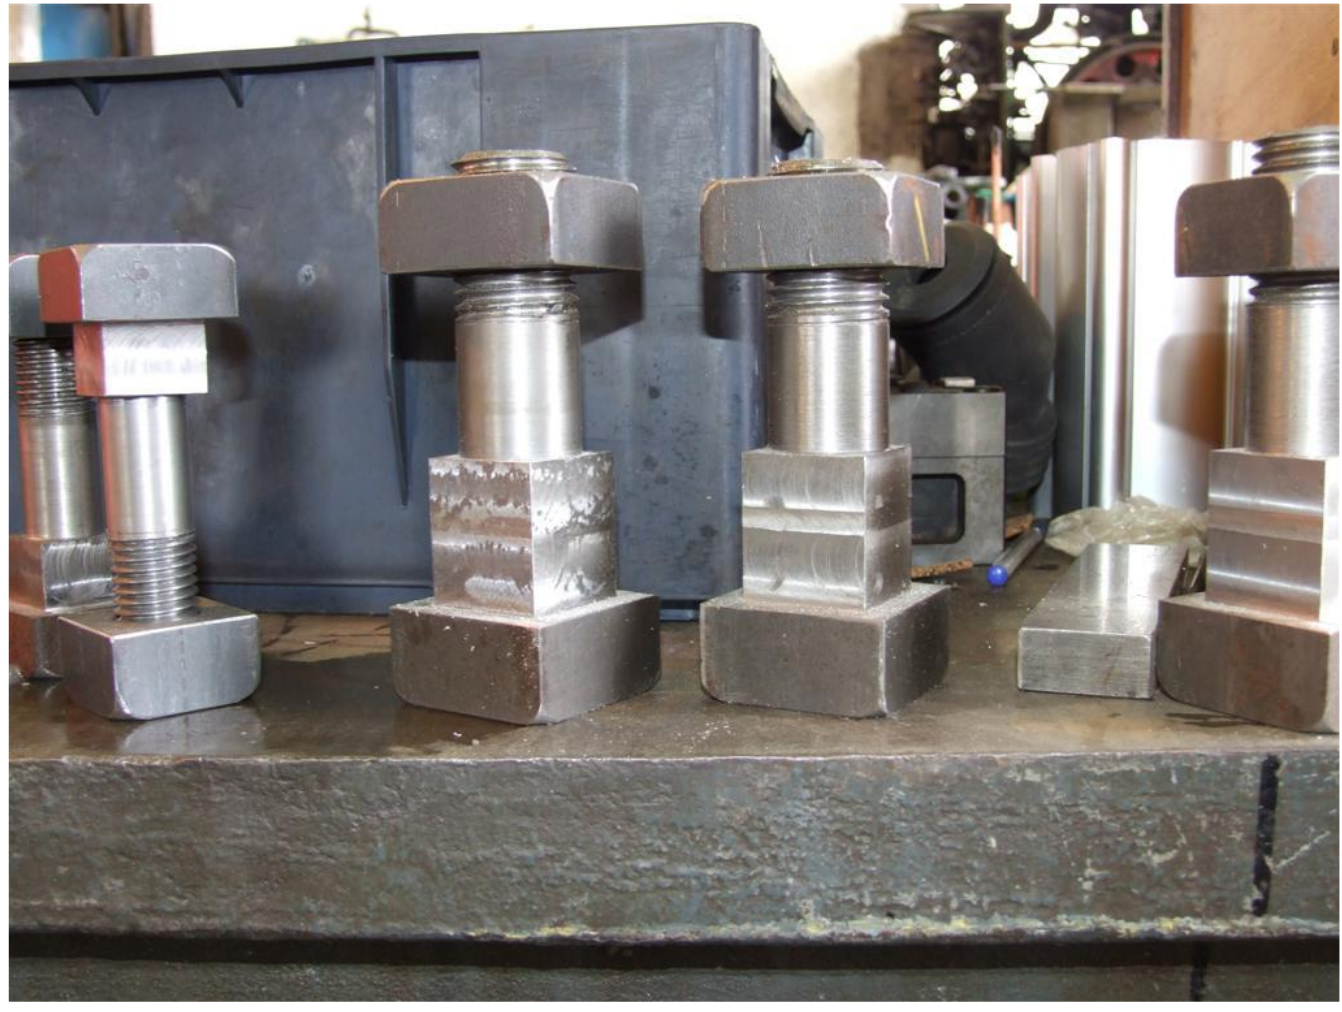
28/07/2010 Replacement mild steel square-head bolts and nuts to replace original (all damaged or destroyed during dismantling due to corrosion).
